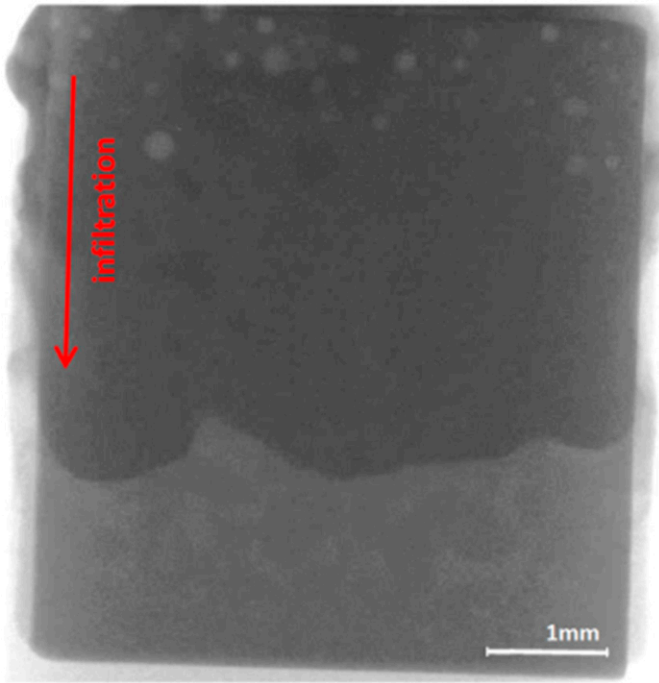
x-ray image of intermetallic connection of the remelting test sample.
